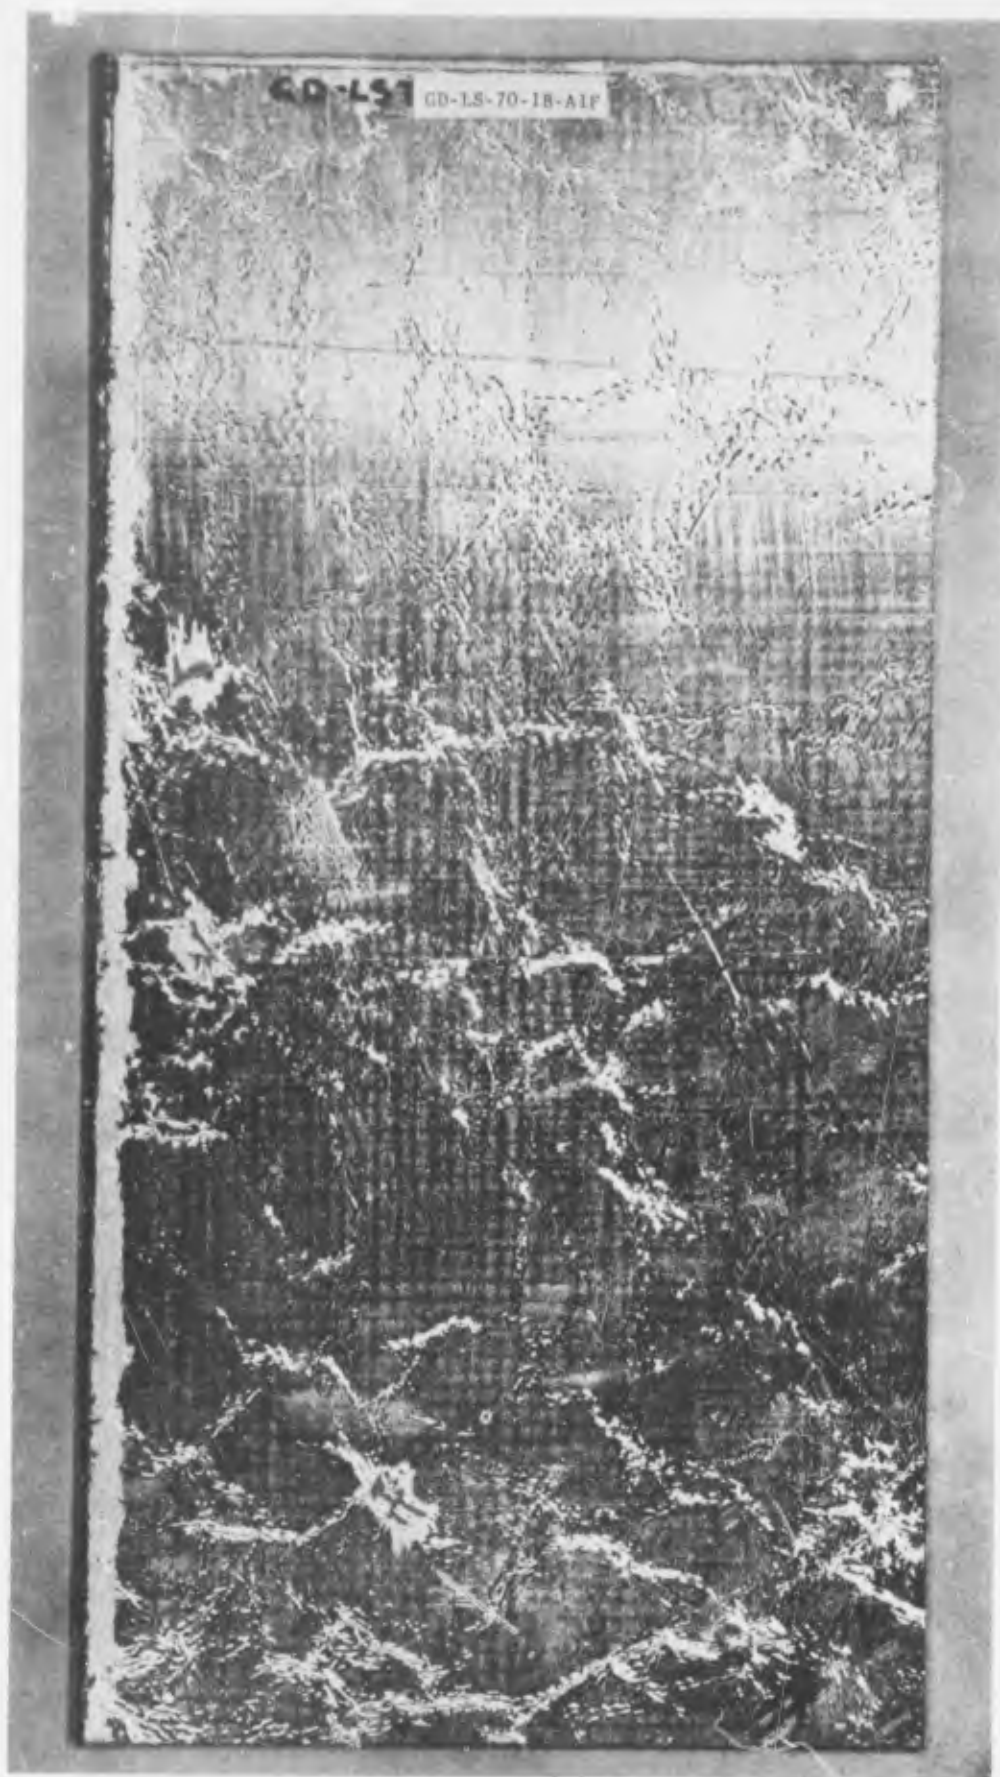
Front Surface of Sample Panel With Aluminum Foil Coating
